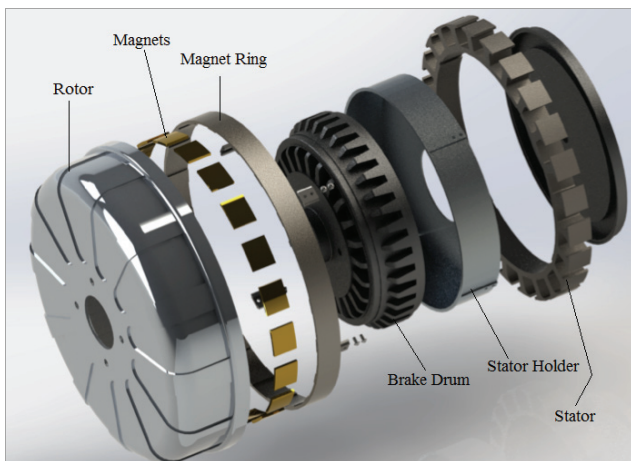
On-drum in wheel BLDC electric motor design to be prototyped.
